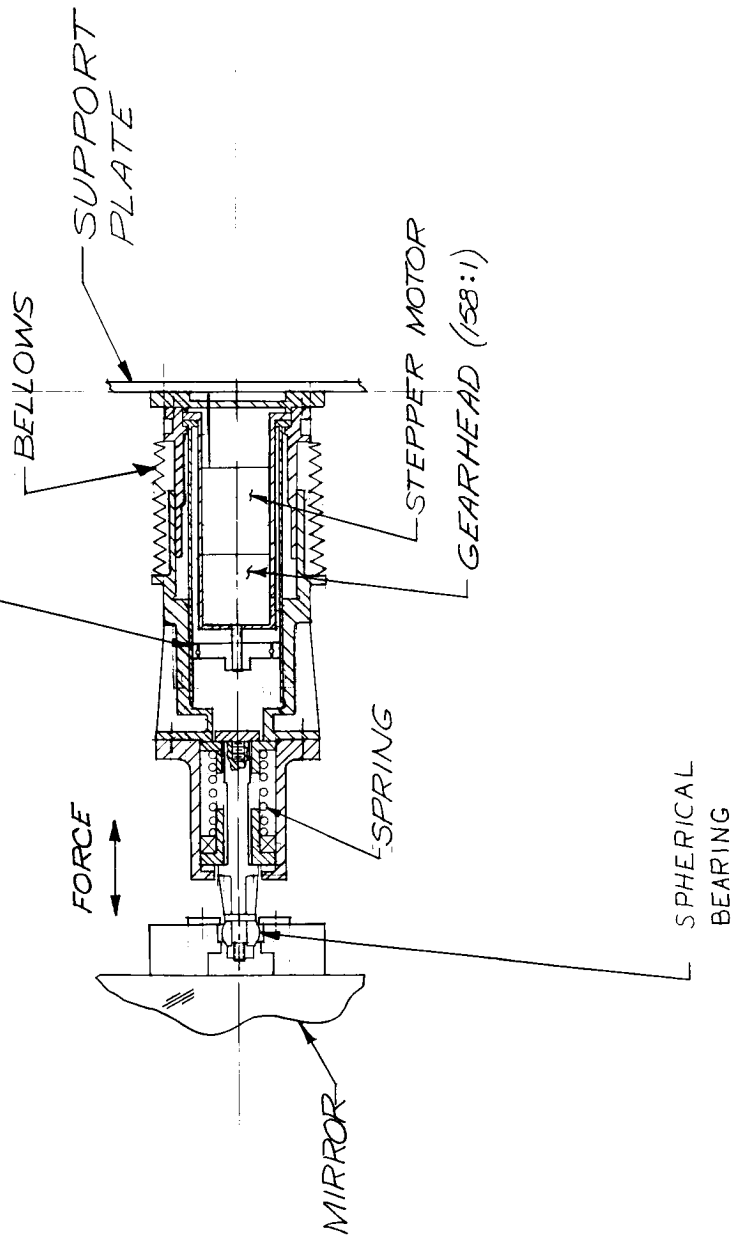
Primary mirror force actuator layout (dwg. no. 911375)
